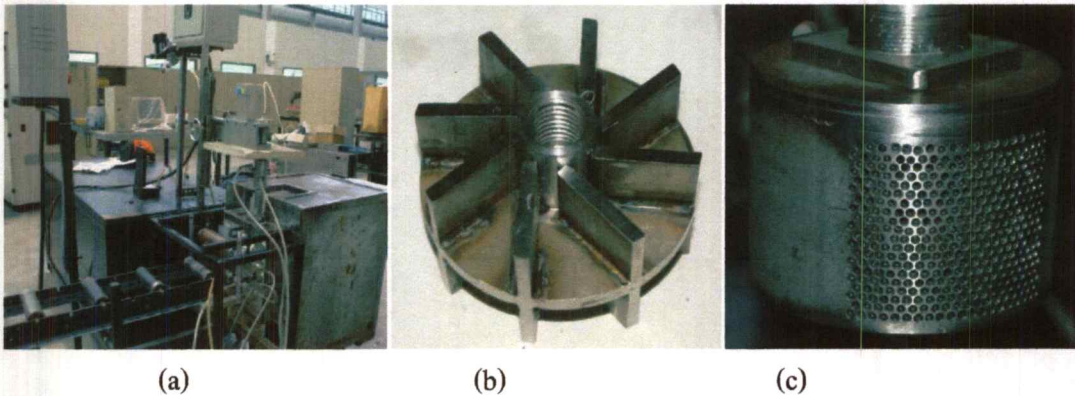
Aluminium foam sheet production generator: (a) the whole equipment, (b) an impeller and (c) a stator.
